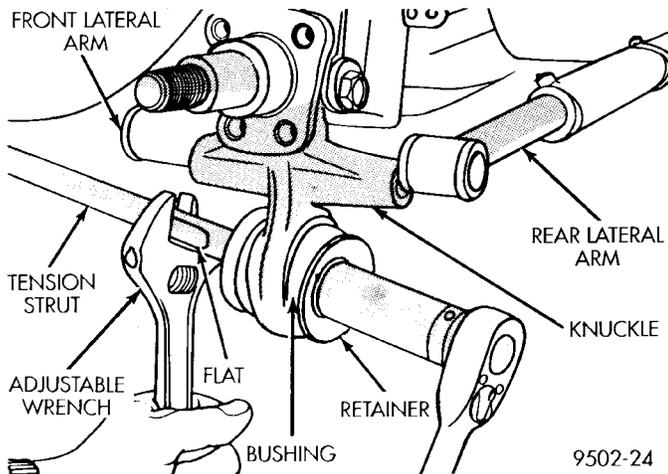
Knuckle To Strut And Lateral Arm Mounting Bolts
